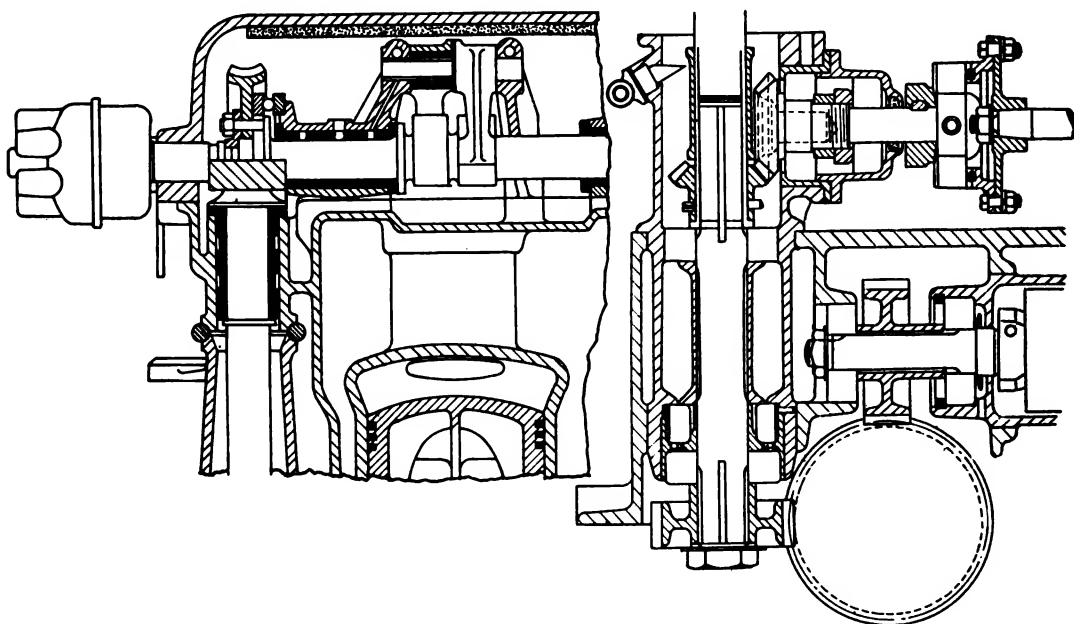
CAMSHAFT DRIVE OF LANCHESTER ENGINE
